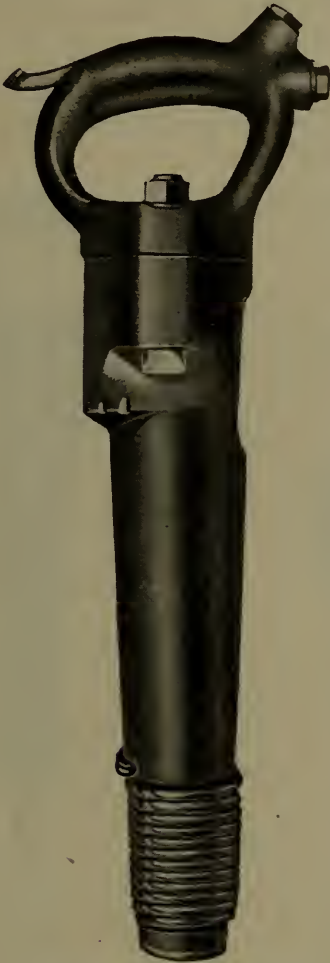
Riveting Hammer equipped with safety rivet set retainer.
